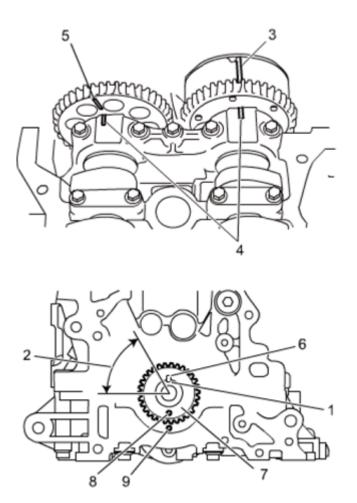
Aligning Timing Mark On Crankshaft Timing Sprocket With Lower Crankcase Courtesy of SUZUKI OF AMERICA CORP.
